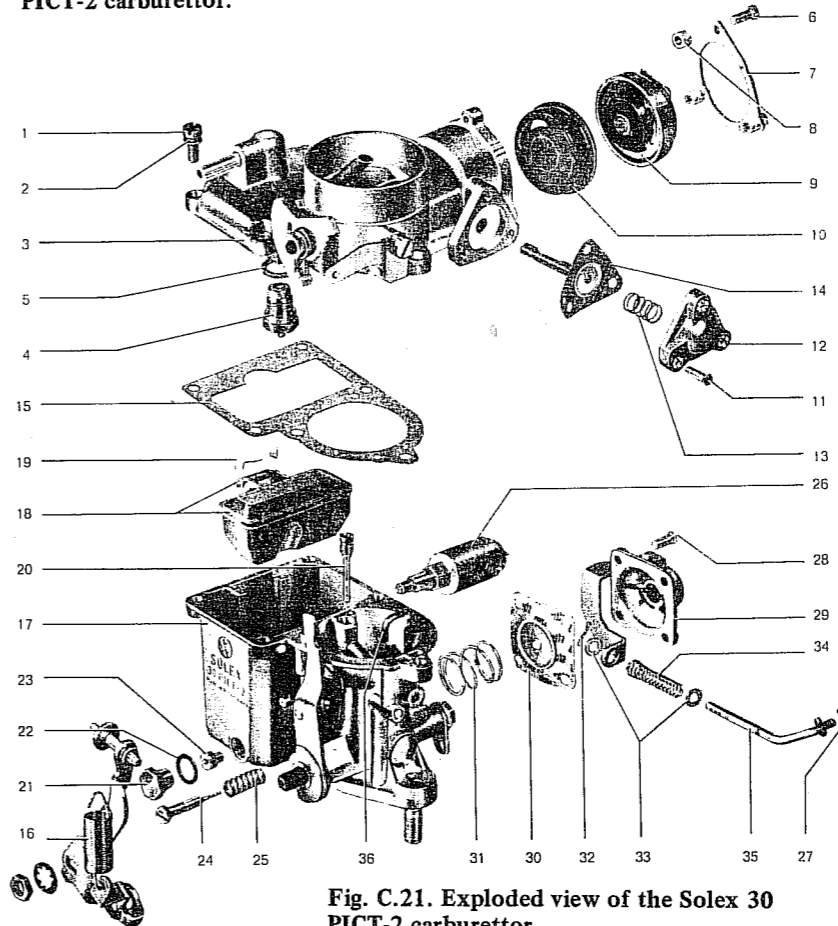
Exploded view of the Solex 30 PICT-2 carburettor.
